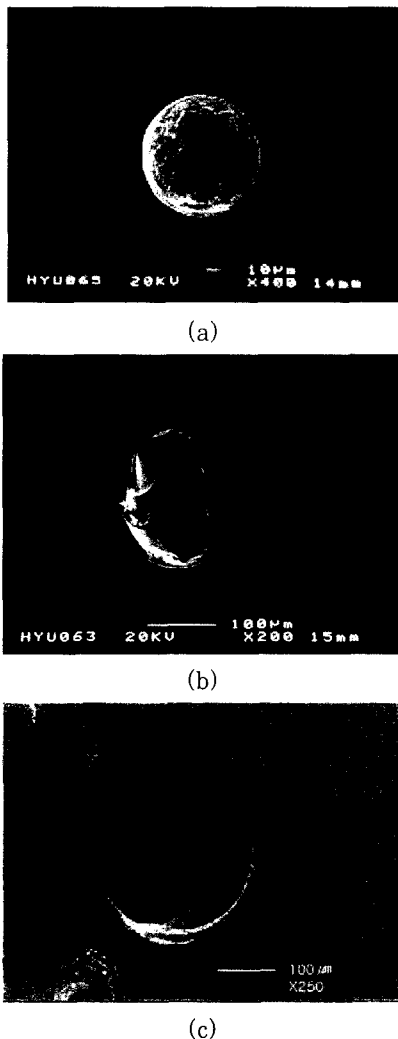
Inner cavities in cross section of weld a) spherical type A, b) spherical type B, c) worm hole type
